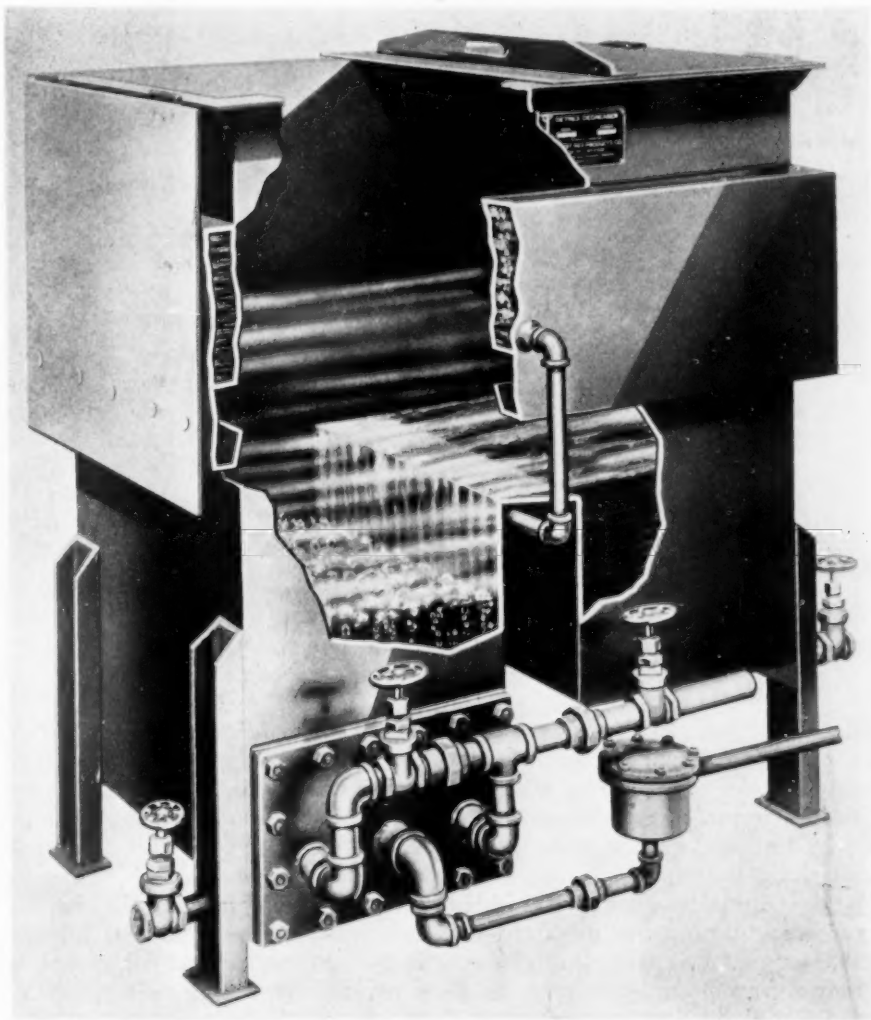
Fig. V. Cut-away view of a two-dip type, steam heated degreaser, showing solvent levels in both chambers and vapor space above the boiling chamber.
